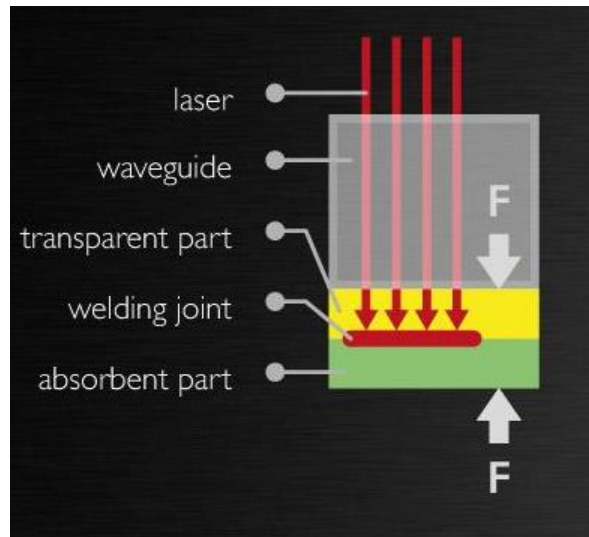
Scheme of a Simultaneous Laser Welding System with a Metallic Waveguide
